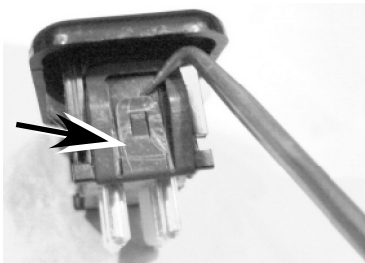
Use a small, flat-bladed screwdriver or a pick to pry loose the retaining spring clip (arrow) on short sides of the switch housing.
